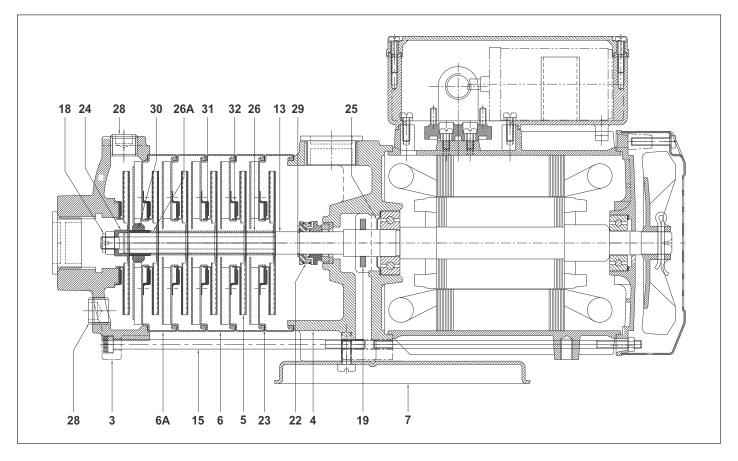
SECTIONAL DRAWING OF MH, MHI, MHN 2 & 4 PUMP
